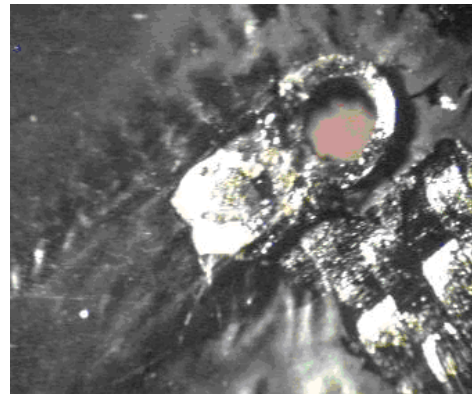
Physical Damage Done to the Board's Surface Uncovering the Underlying Woven Structure of the PCB After the Test
